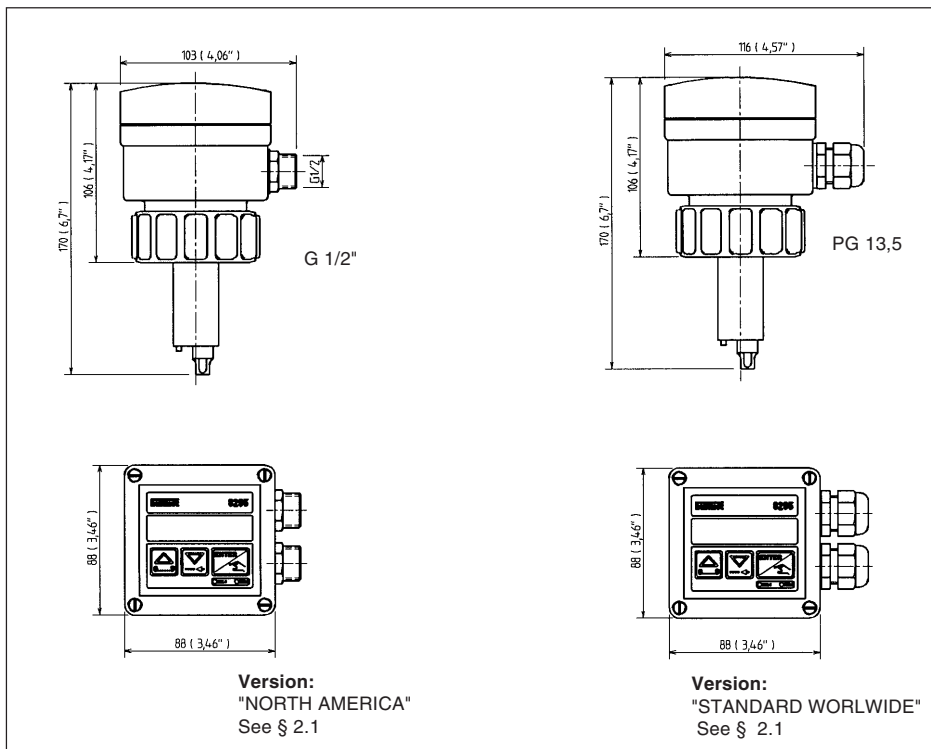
Dimensions pH transmitter type 8205 compact housing
